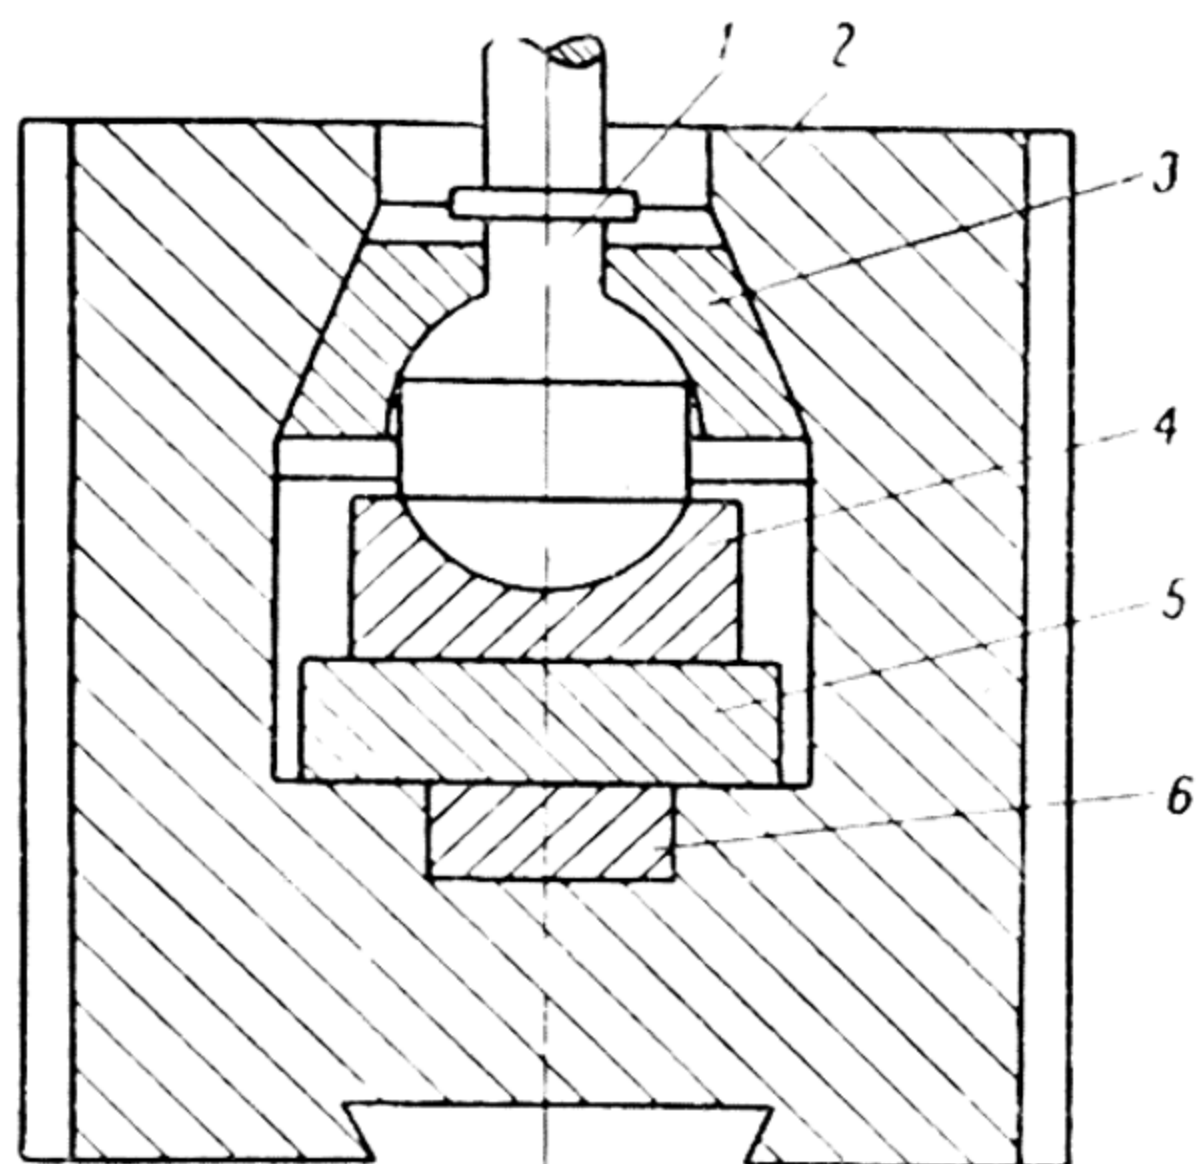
Dismountable assembly of piston rod with ram of hammer (Uralmash Works)
